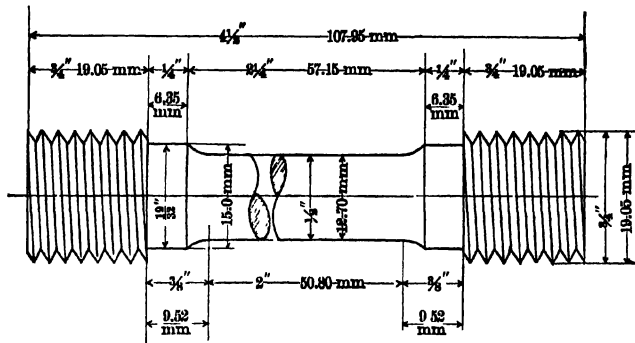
SHORT FORM OF STANDARD TENSION-TEST SPECIMEN.
